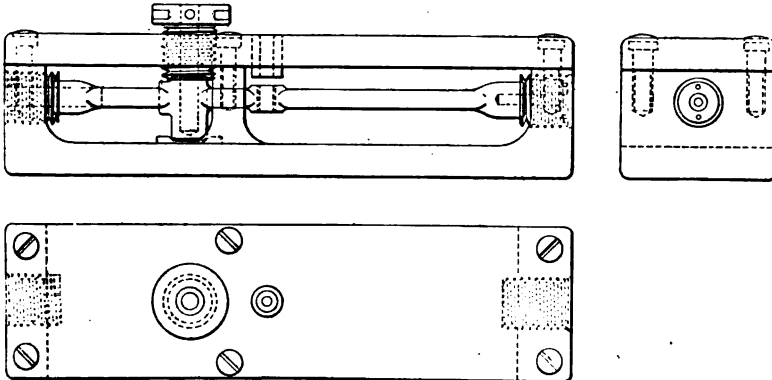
Jig for Drilling Work Shown in Fig. 56.
